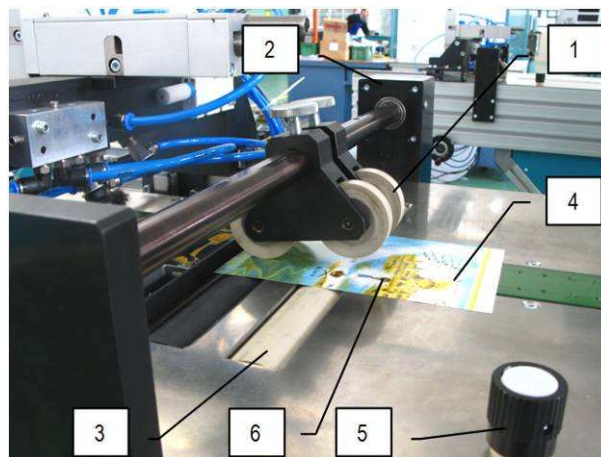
Photo of the horizontal module for sheet conveying: 1 – feed rollers, 2 – pneumatic rotary drive, 3 – driver rollers, 4 – feed belt, 5 – vacuum regulation system, 6 – transported sheet
